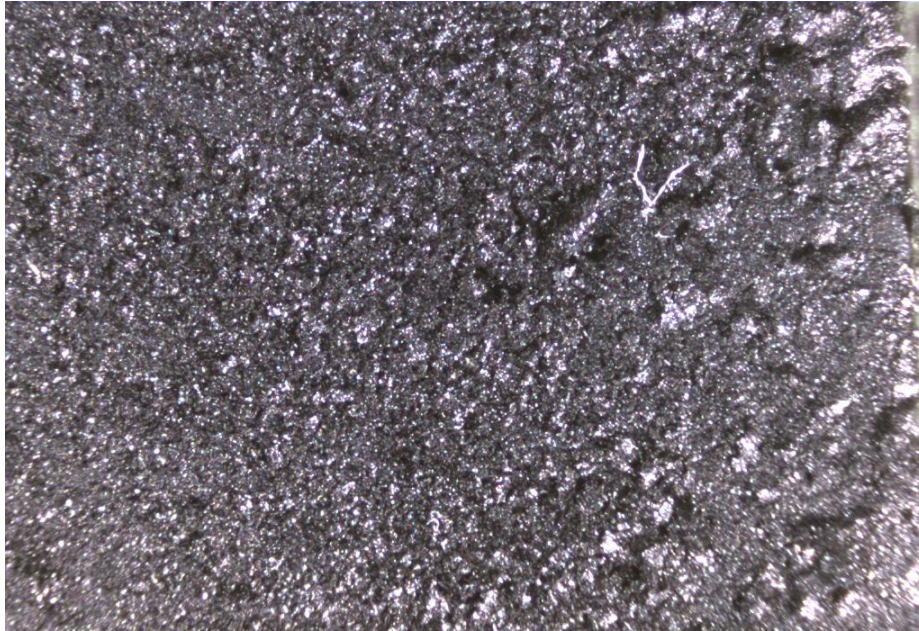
This image reveals a coating on the surface of a part that has started to bubble after soaking in 1M2P.
